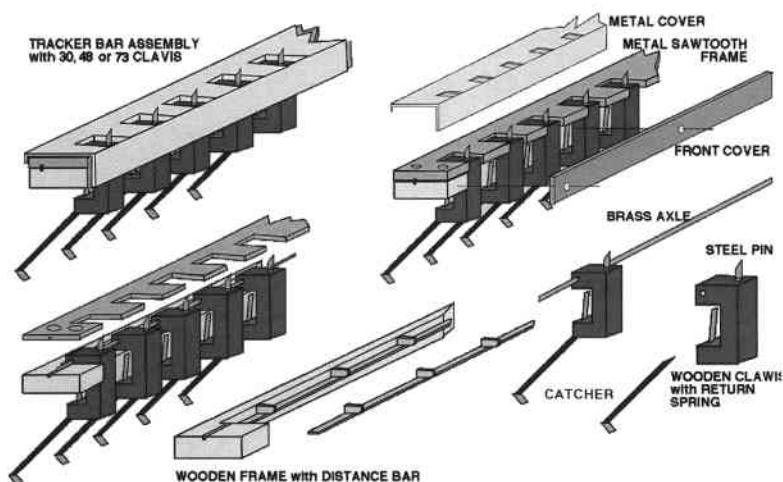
TRACKER BAR ASSEMBLY and its COMPONENTS.
